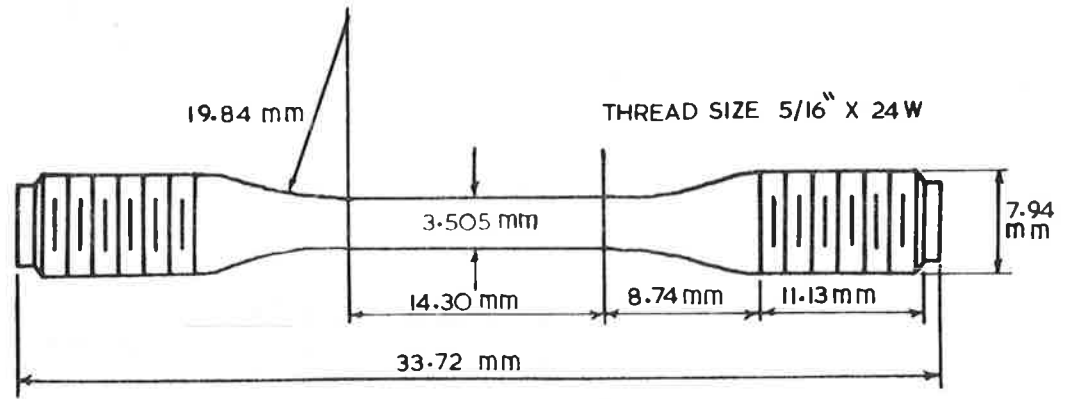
Dimensions of Specimen used to Obtain Mechanical Properties of Steel A and B
